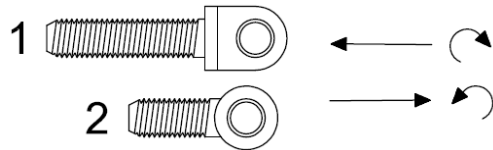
TT, TH, TS and TS -window installation to the T-board or stone wall.
